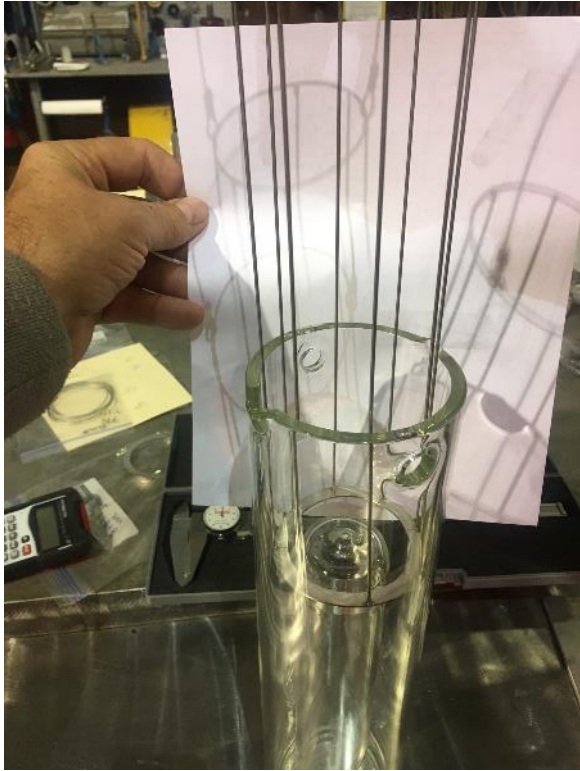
Test fit of capsule shell basket into glass leach vessel at American Fabrication (basket fabricators).
